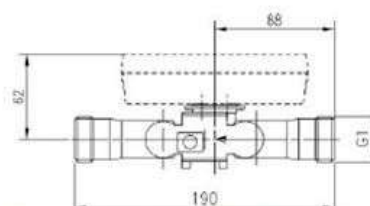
Overview dimensions: overall length 190 mm (thread)
